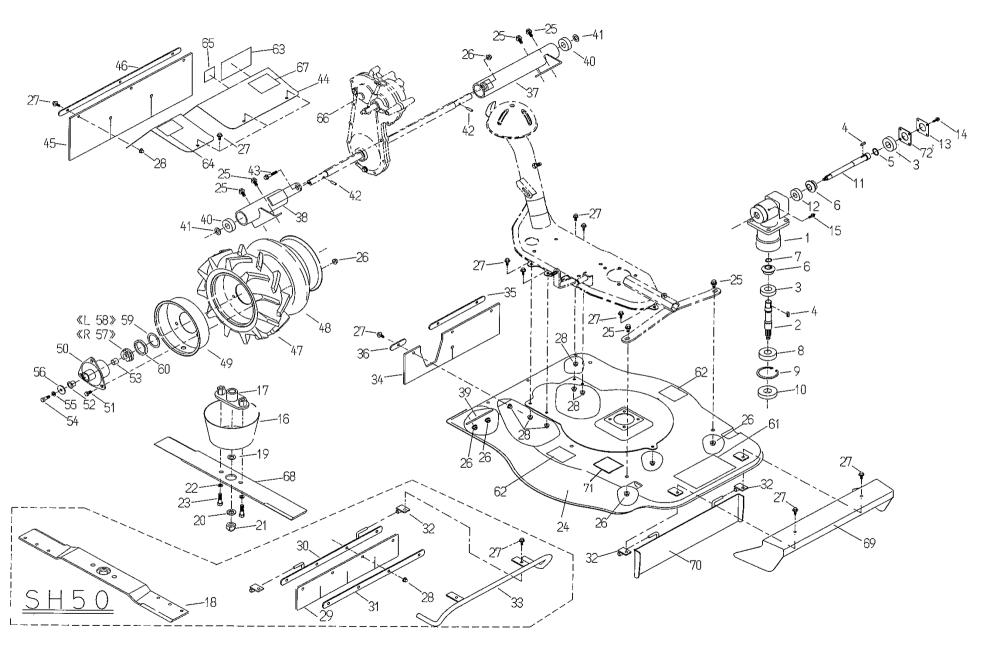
GEAR BOX, ROTARY COVER & TIRE
